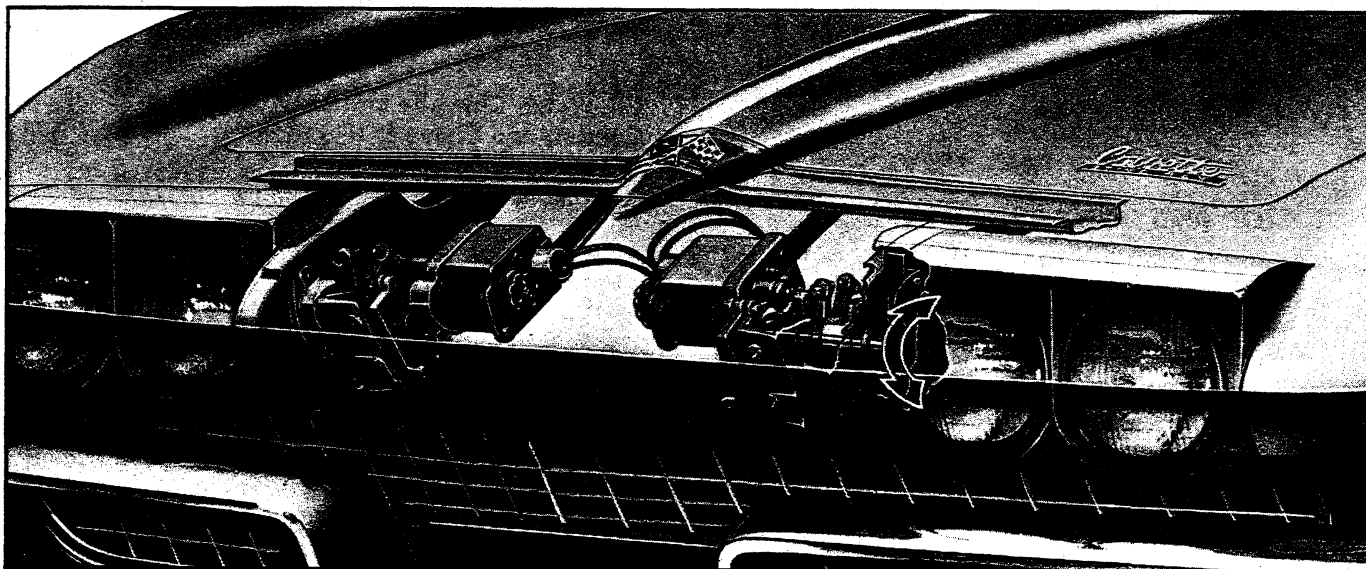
Headlamp Panel Actuating Motor Mounting (Corvette).
